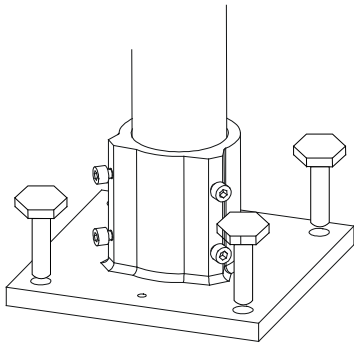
Assembled Universal Mount and Base Plate hole pattern
